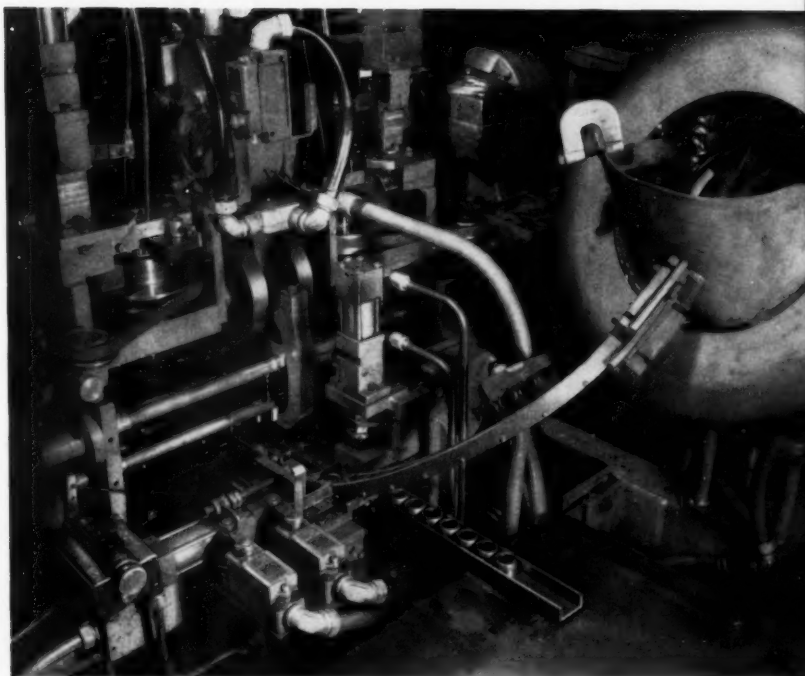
Close-up of unloading end of the machine seen in the heading illustration for automatic assembly of rollers and dust caps in universal-joint needle bearings.
